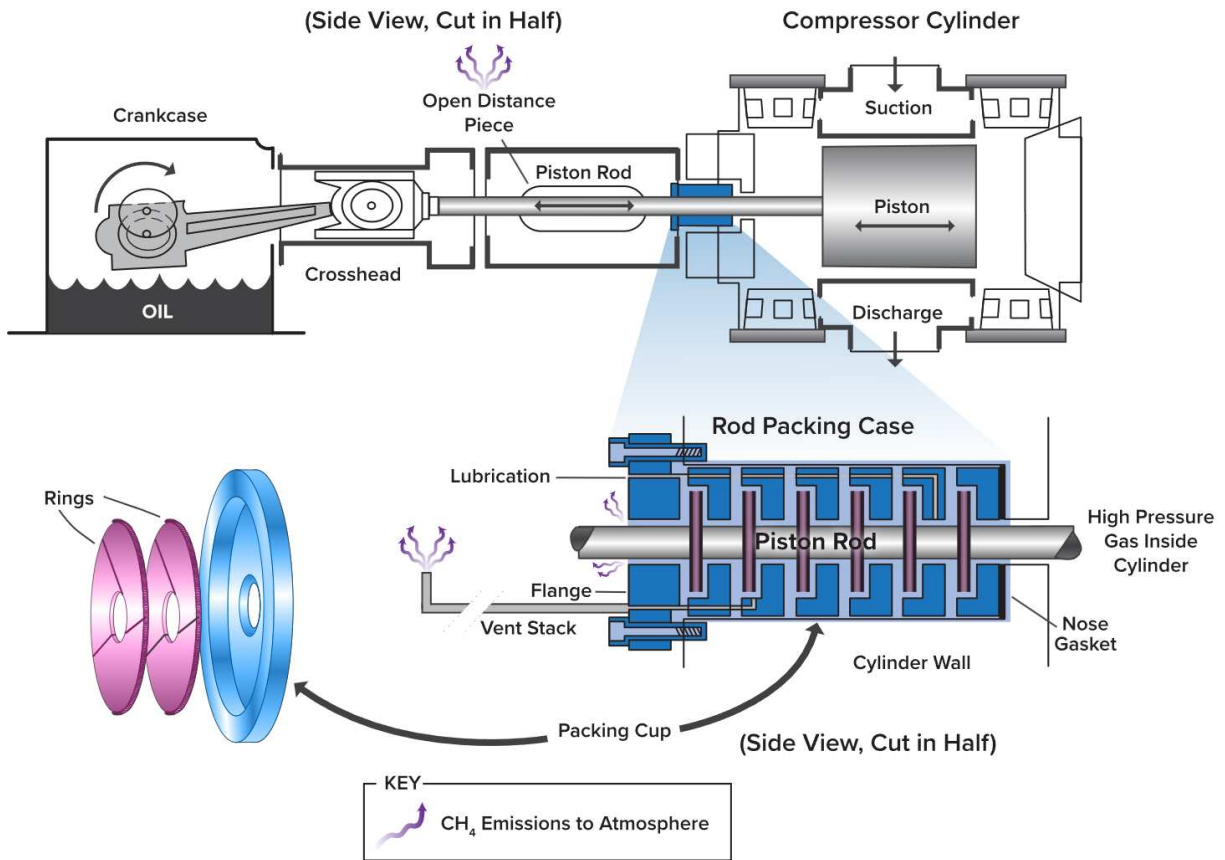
Cutaway of reciprocating compressor cylinder with magnified view of rod packing. Figure taken from U.S. E.P.A.
